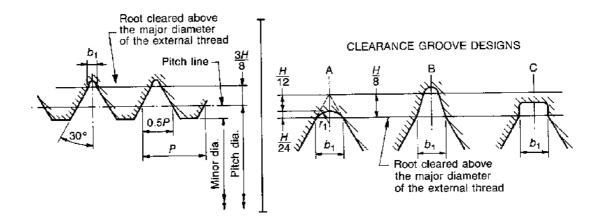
PROFILE FOR RING AND CALLIPER GAUGES WITH COMPLETE FLANKS
